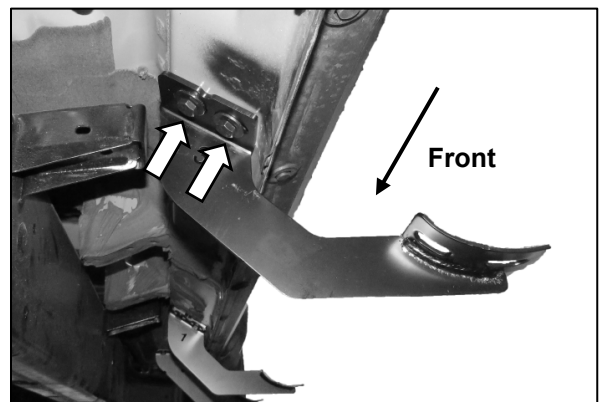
Attached Passenger/Right Center/Rear Mounting Bracket at Center Mounting Location
